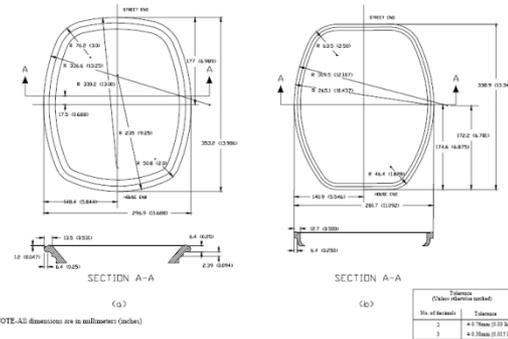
Flange dimensions for refractors for small horizontal-burning HID luminaires
